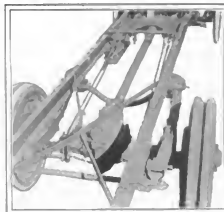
Rear end of Velie 1 1/2-tonner, showing flexible frame and Hitches drive
